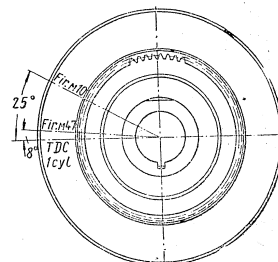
Diagrammatic View of the Starting Engine Flywheel Face with the Marks Made on it for Ignition Timing.
